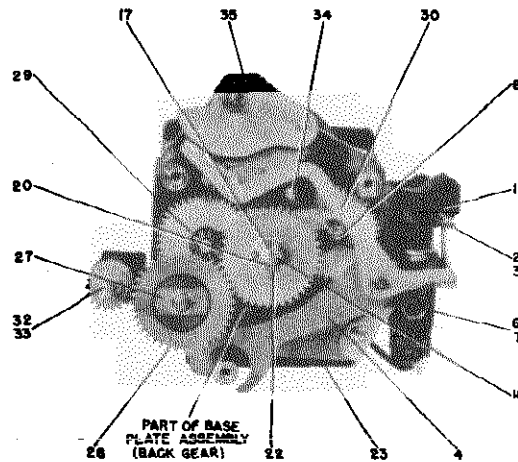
Front View, C57 Clocks—Front Plate Removed
